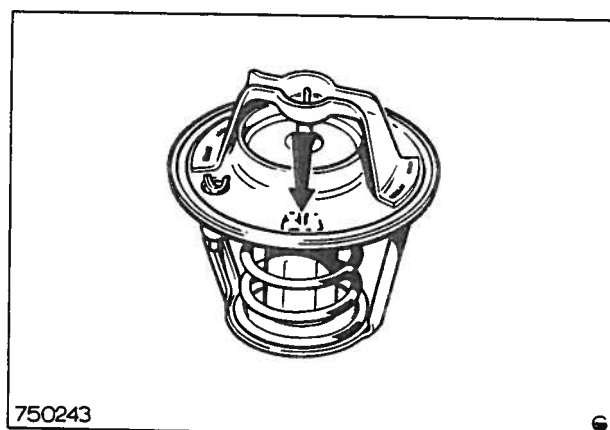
Location of stamping showing thermostat 'crack-open temperature
